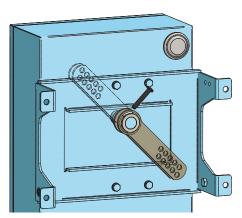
UMPlus - back side, Sense of rotation of the driving crank adjustable by a bolt
